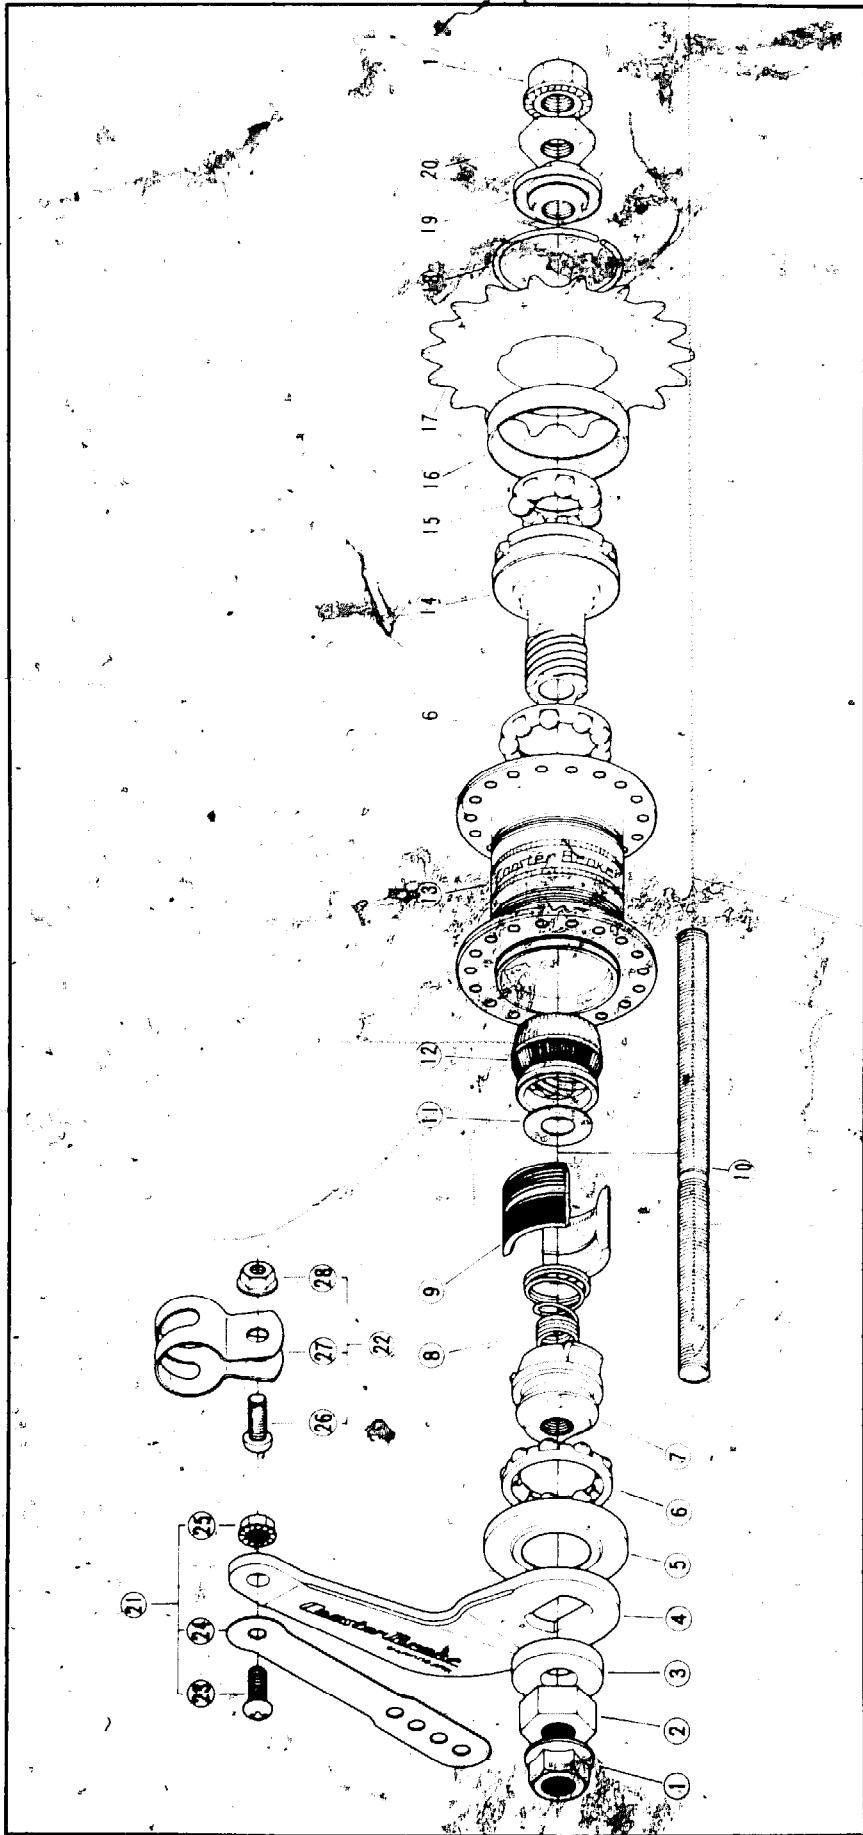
Shimano B-Type coaster brake. Parts are: (1) axle nut, (2) axle nut, (3) arm washer, (4) brake arm, (5) dust cap, (6) ball retainer C, (7) brake cone, (8) clutch spring, (9) brake shoe, (10) axle, (11) clutch washer, (12) clutch cone, (13) hub shell, (14) driver, (15) ball retainer A, (16) dust cap, (17) sprocket, (18) snap ring, (19) cone with dust cap, (20) lock nut, (21) brake arm clip set—flat type, (22) brake arm clip set—band type, (23) clip bolt, (24) brake arm clip—flat type, (25) clip nut, (26) clip bolt, (27) brake arm clip—band type and (28) clip nut.
